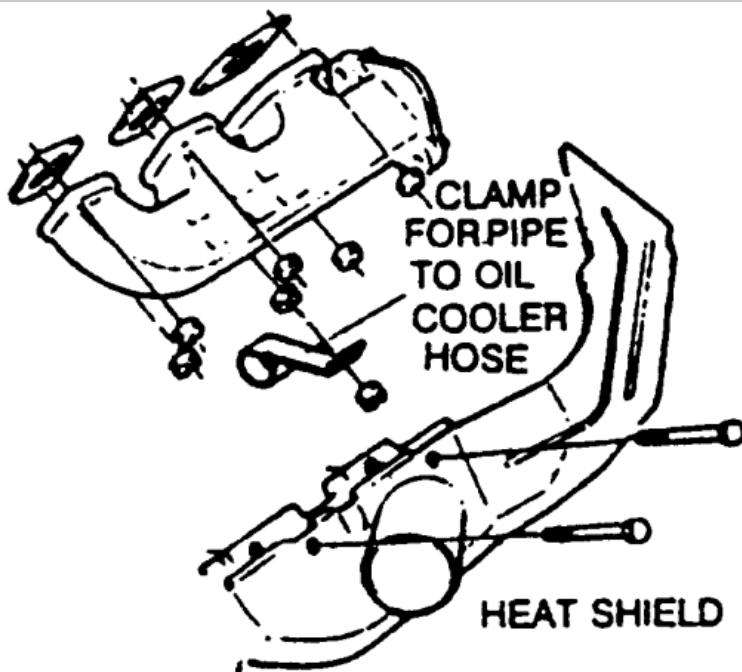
Exploded view of the exhaust manifold assembly-2.8L 6-cylinder engine
